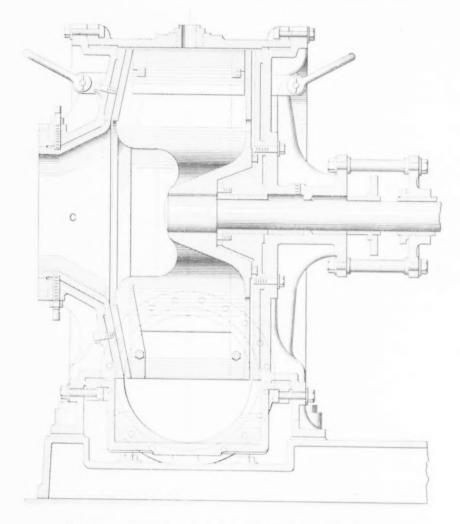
Sectional View of Centrifugal Pump for Dredging
